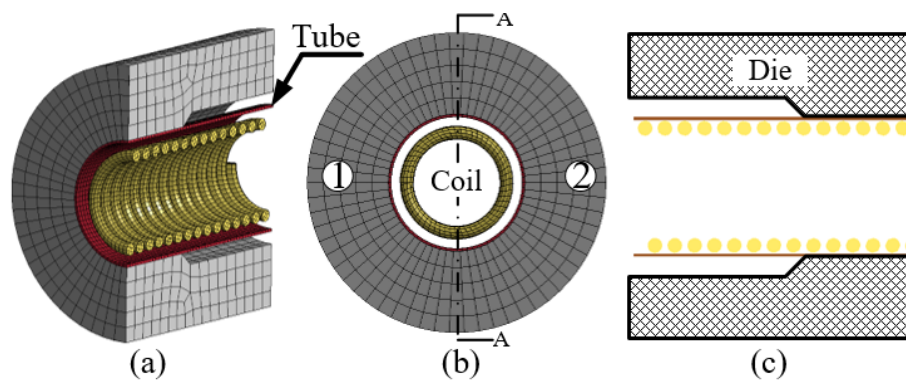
EM forming setup model (a) 3D model, (b) Front view, (c) Cross section side view
